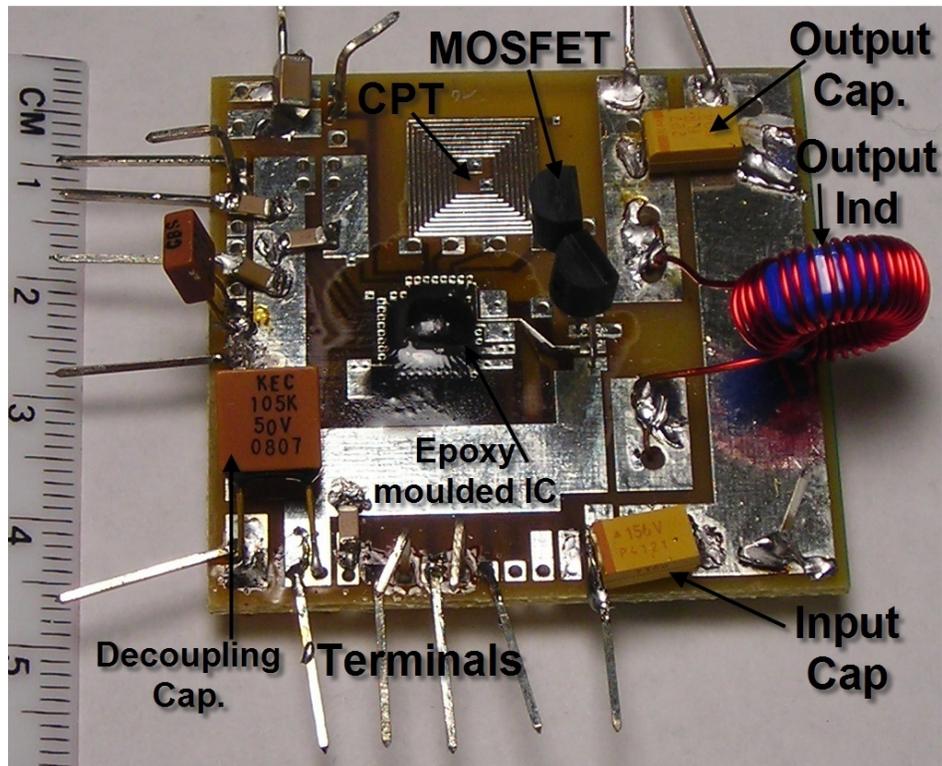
A complete SMPS prototyped on a FR4 based 4-layer board.
